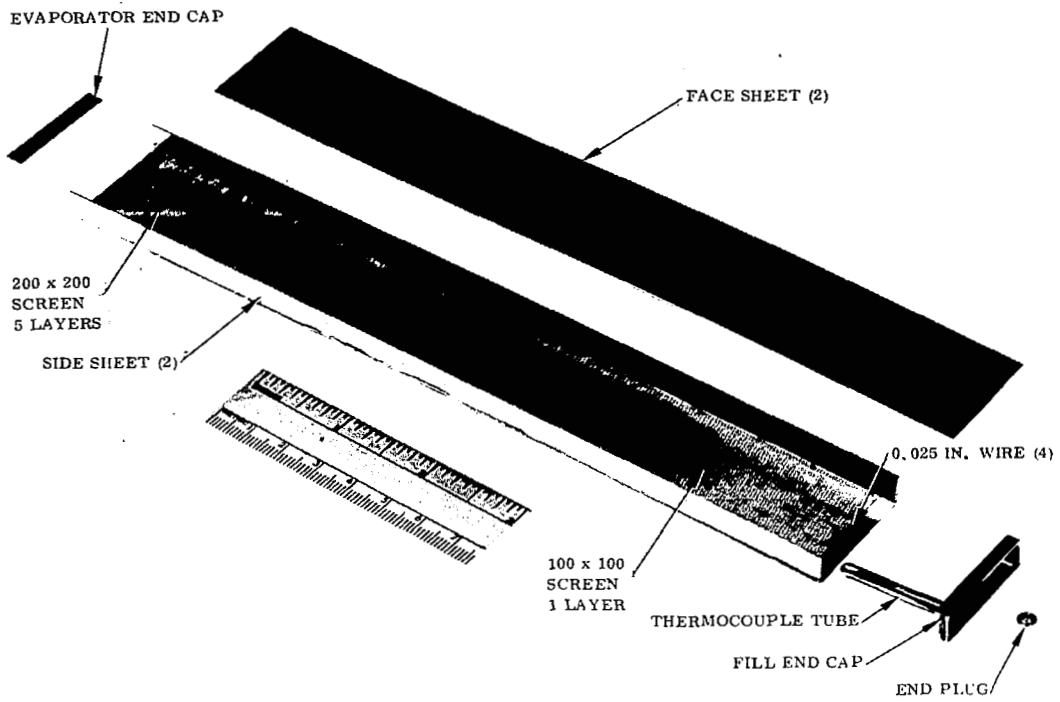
Disassembled Vapor Chamber (Heat Pipe)
